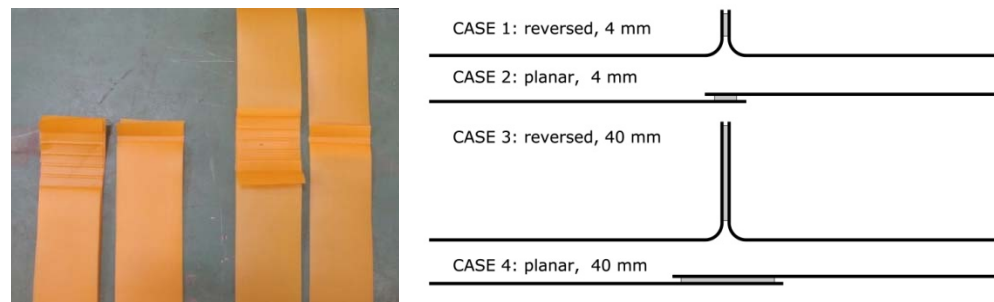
SAMPLES AND WELD ARRANGEMENTS
